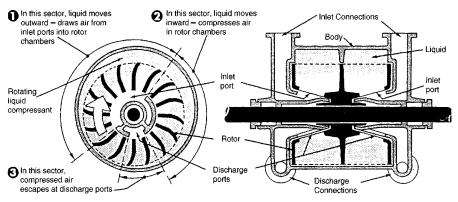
A sectional and end view of a liquid ring compressor (courtesy of Nash Engineering Co.).²
